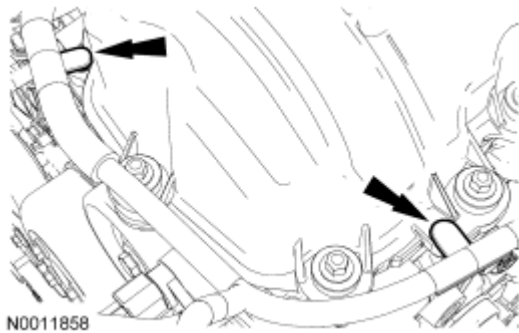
Locating Engine Wiring Harness Pin-Type Retainers
